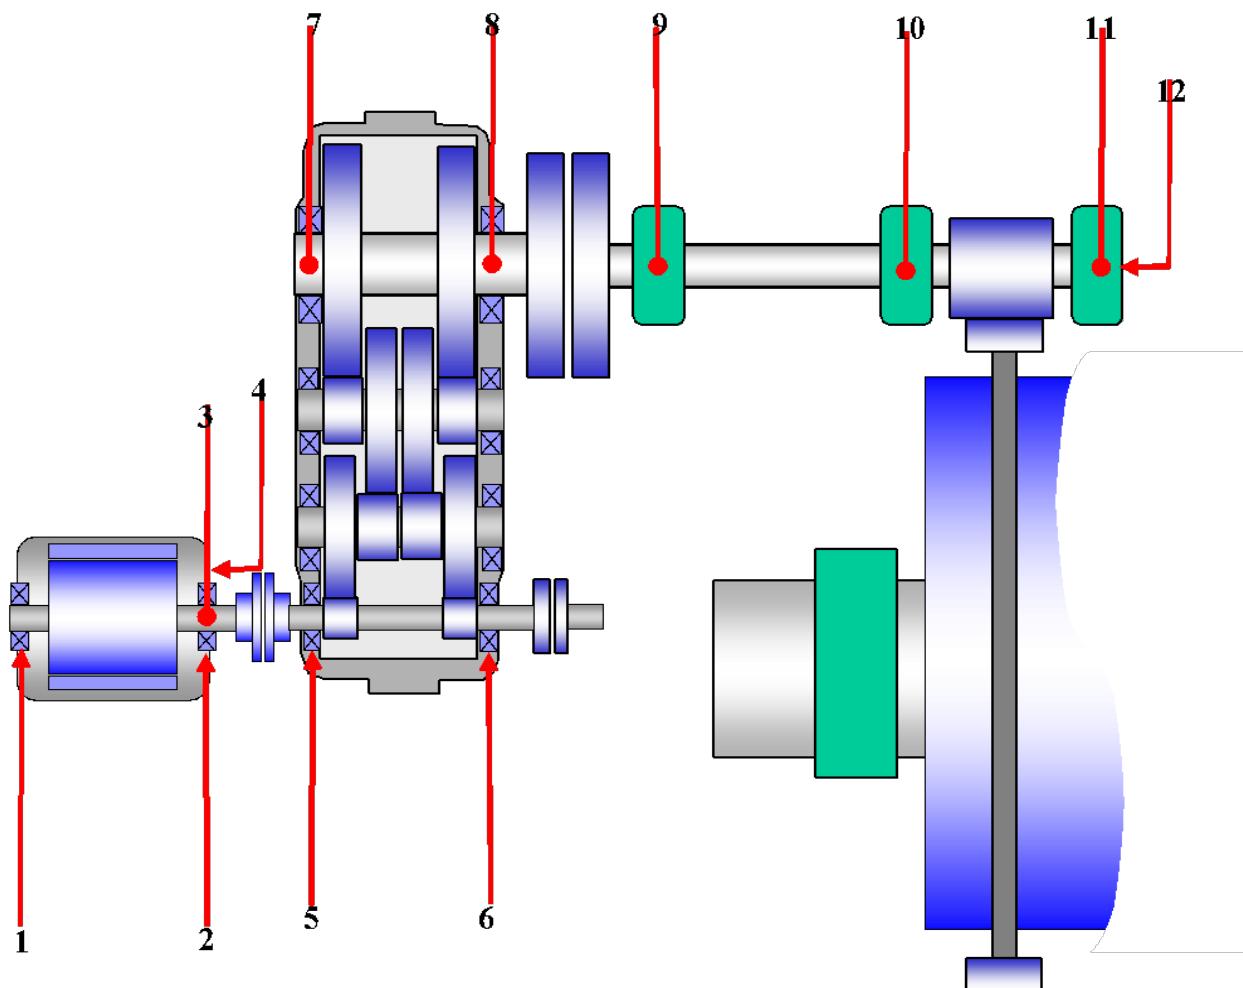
Ball Mills and Kilns - Girth Gear drive measurement point's location
